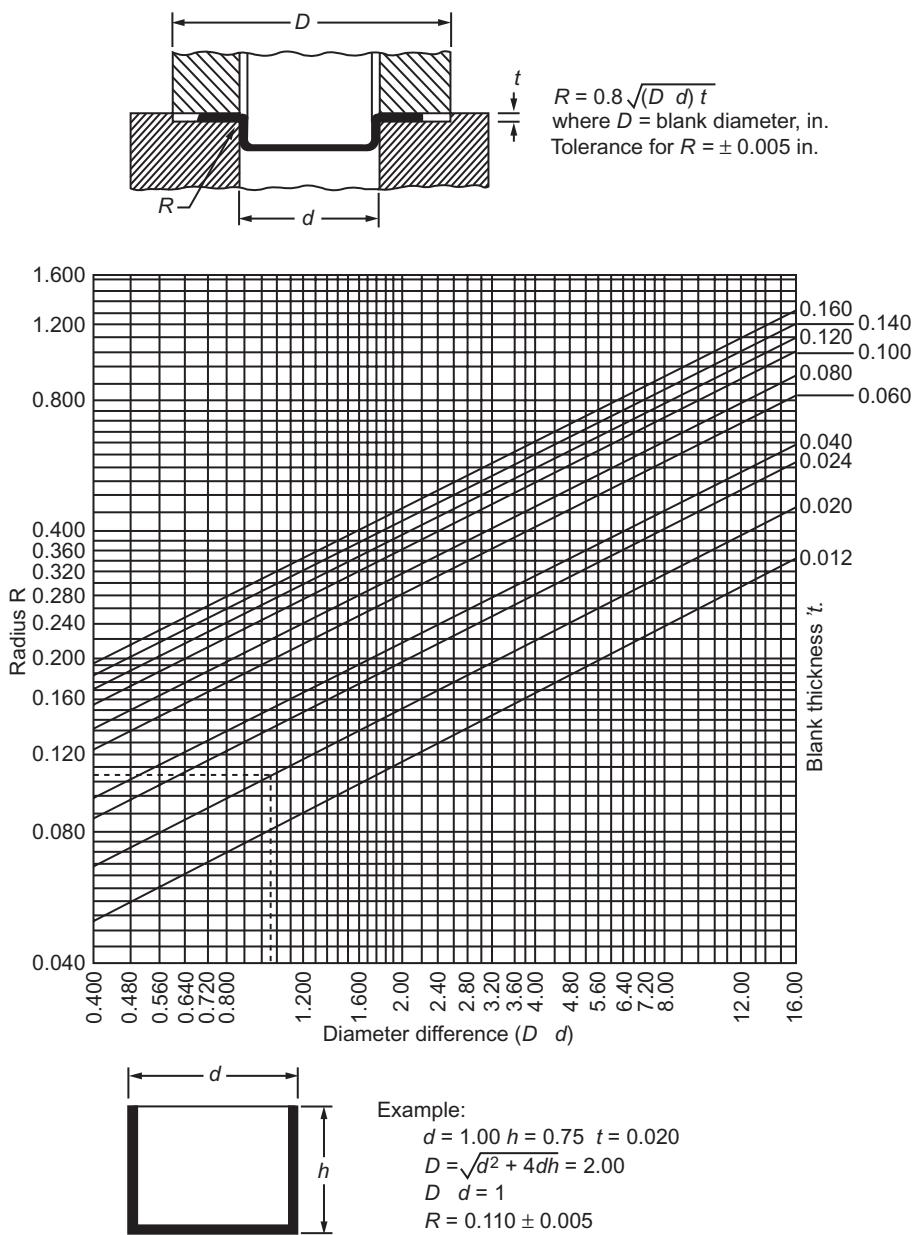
Nomograph for determining draw-die radius. Courtesy: American Machine/Metal working Manufacturing Magazine.
